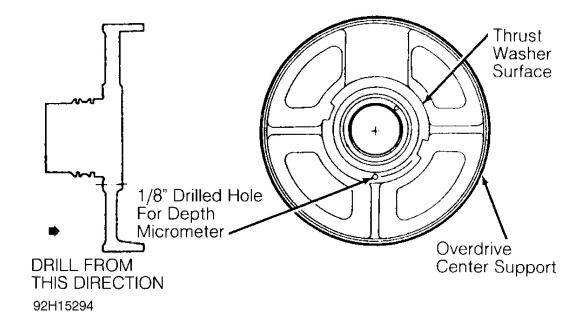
Drilling Fabricated Depth Gauge Fixture Courtesy of FORD MOTOR CO.
